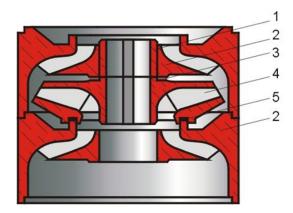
Stage of a submersible pump 1 - protective sleeve; 2 - guiding device; 3 - top washer; 4 - impeller; 5 - lower washer
